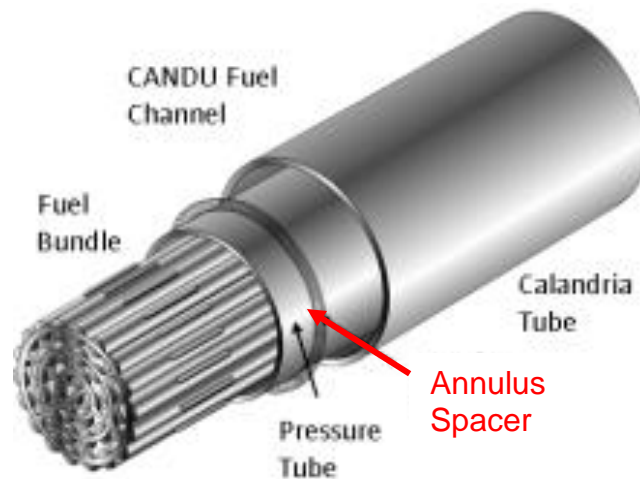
CANDU fuel channel with Inconel X-750 spacer coil highlighted [13]
